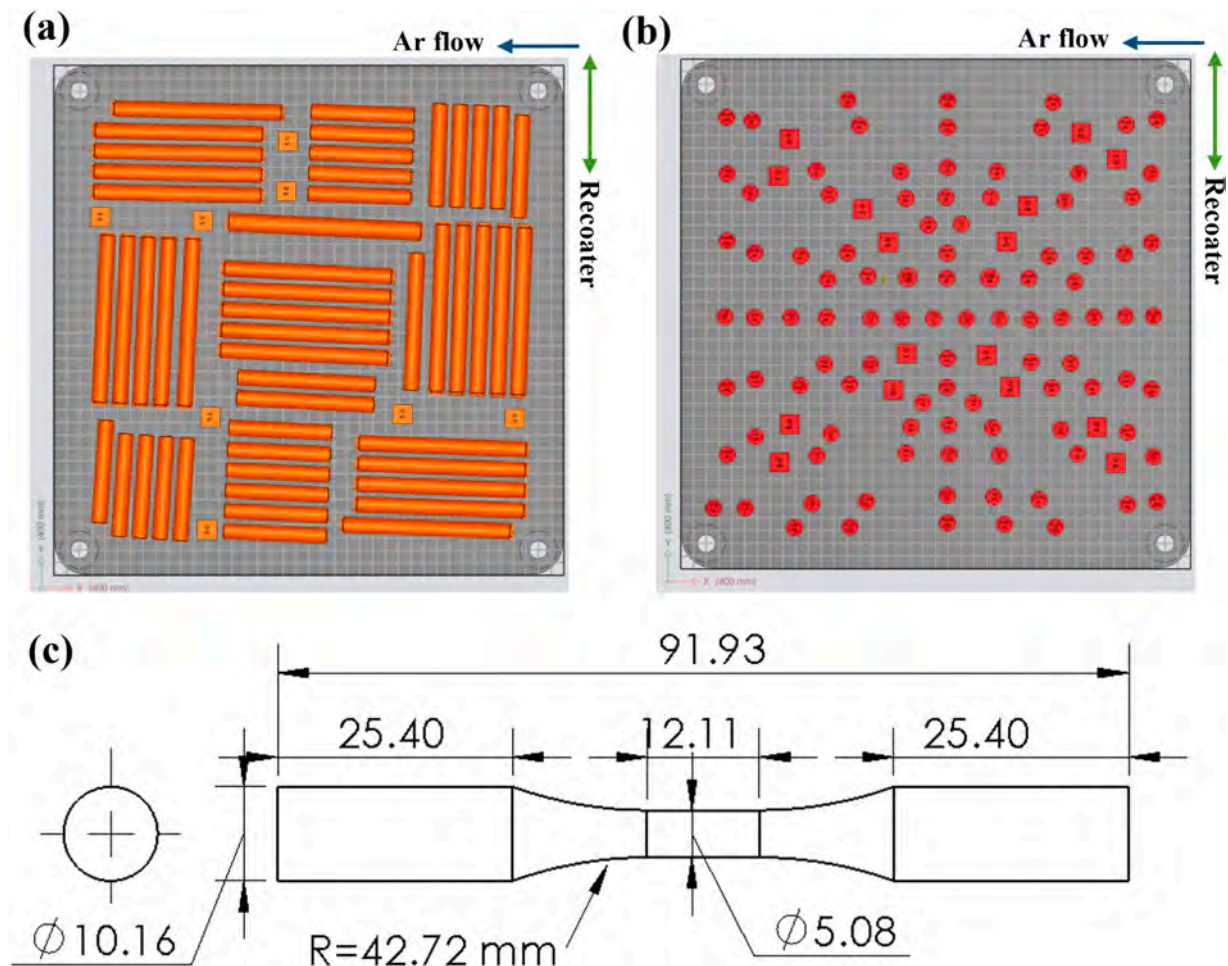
(a) horizontally printed cylindrical rods, (b) vertically printed cylindrical rods, and (c) machined specimen configurations, along with their dimensions (in mm).
